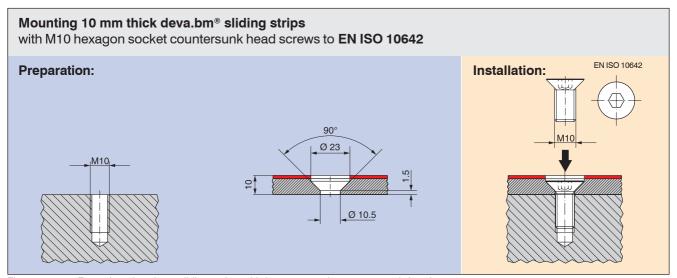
Fastening deva.bm® sliding strips with hexagon socket countersunk head screws
